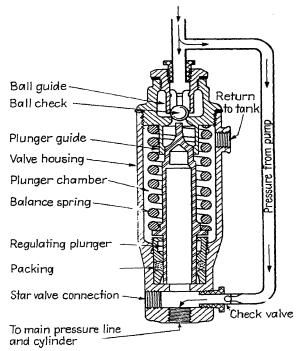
Pressure-regulating valve. (Courtesy of Douglas Aircraft Co.)
